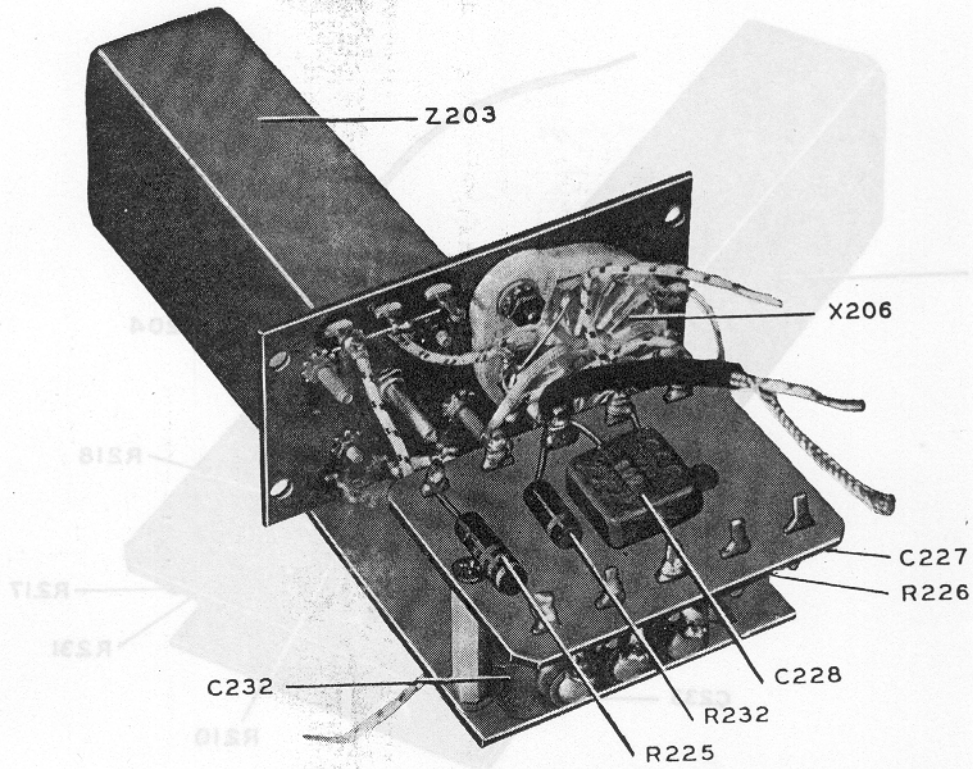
Receiver I-F Amp, Detector Assembly—Bottom View
